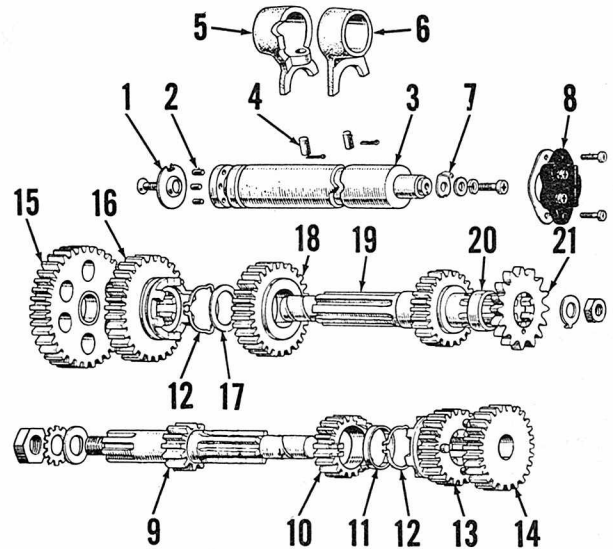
Exploded view of transmission assembly. Top and neutral indicator switch (8) grounds the green light in speedometer housing when in neutral and yellow light when in fourth gear.
